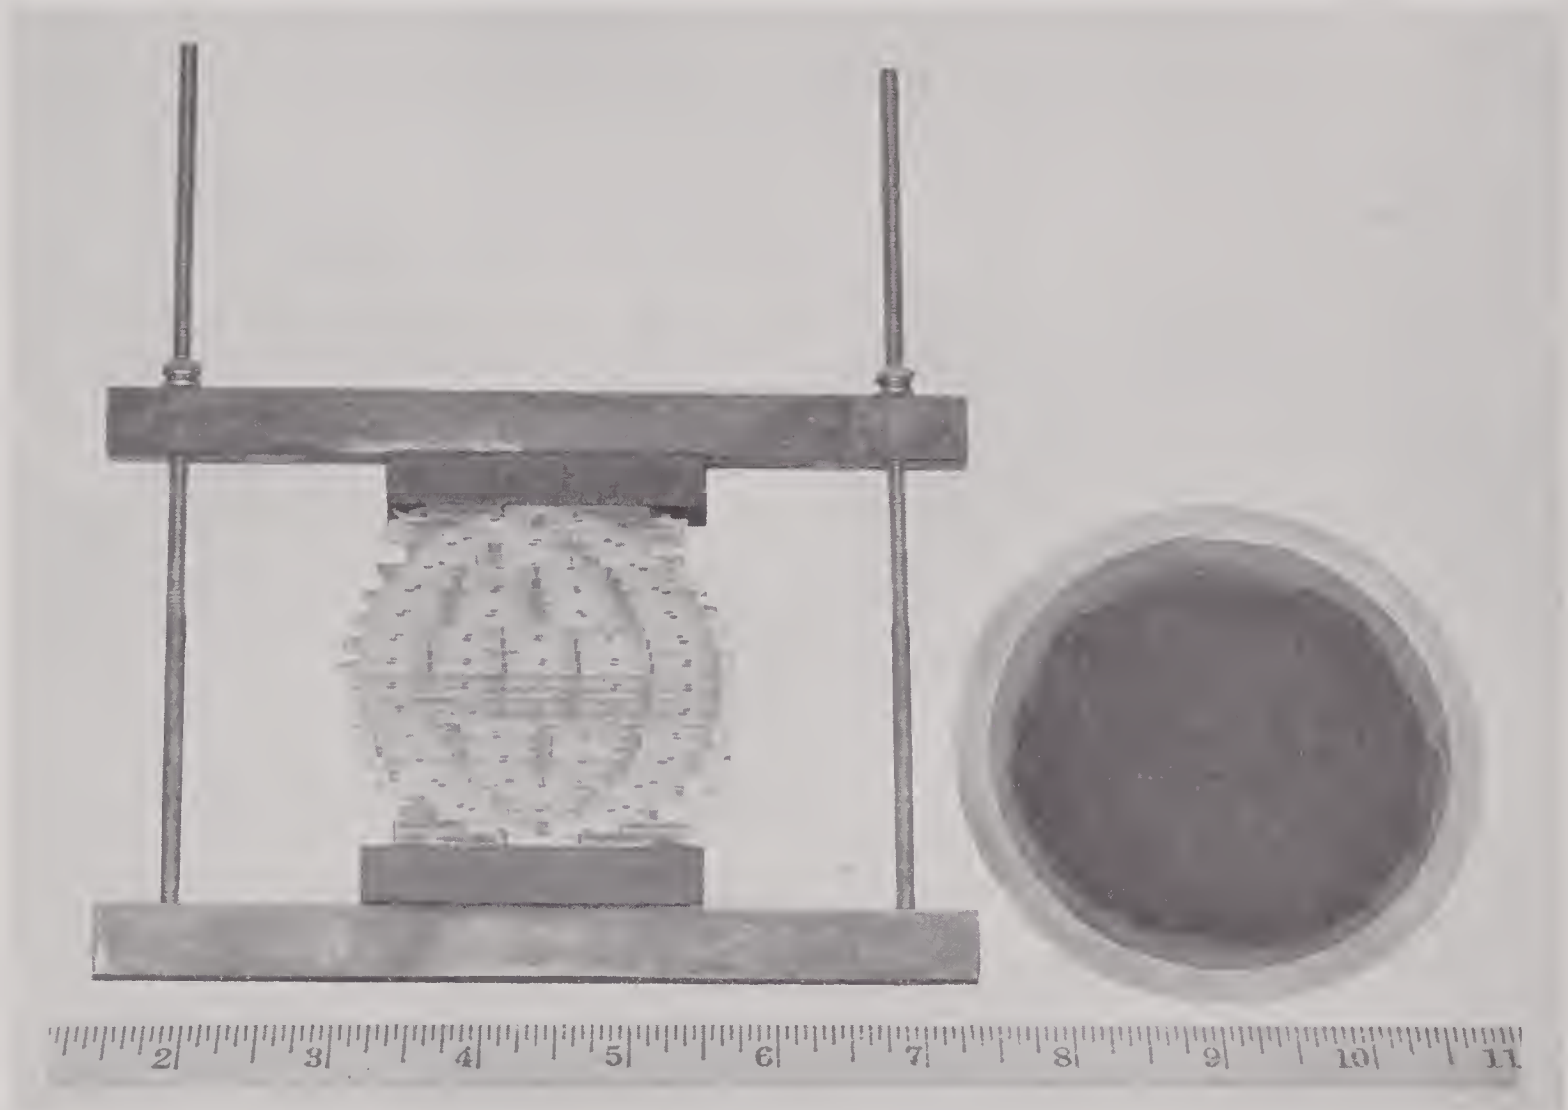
A step in the assembly of the UCDWR EP Transducer. The crystal array has been built up and is shown in its clamp at the left. The rubber diaphragm in an aluminum frame has been prepared for Cycle-Welding. The polarizing marks on the crystal in the array are to guide the assembler so that the crystals will be properly oriented to vibrate in phase.
